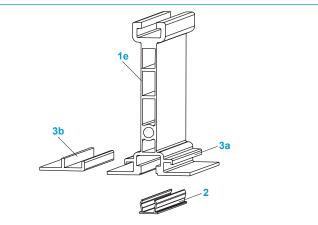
The UFR-55/100L-T/E profile 1e with attachable bearing rail 3b
